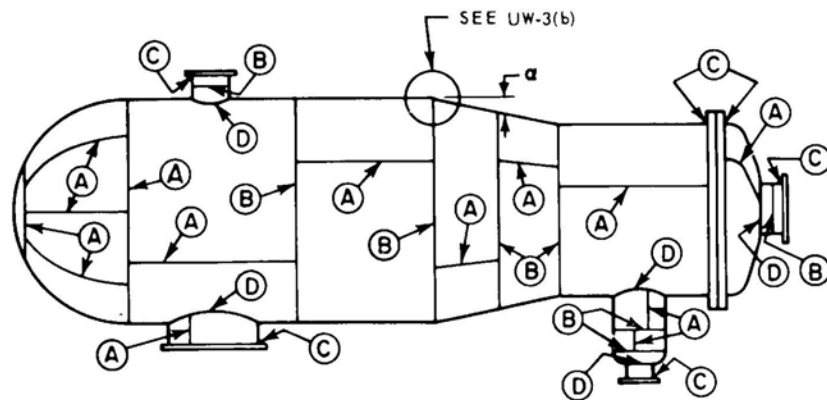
Weld configuration covered by ASME VIII Div.1 section UW. Ballooned symbols refer to weld types
